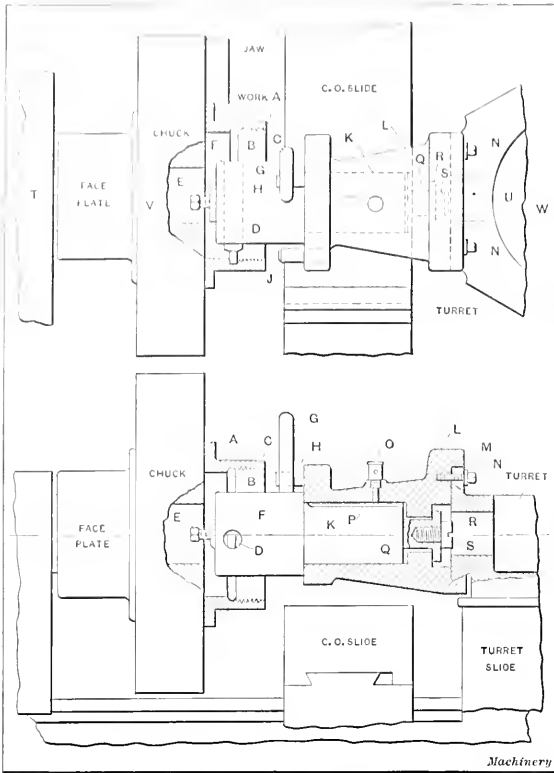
An Eccentric Recessing Tool for the Turret Lathe
